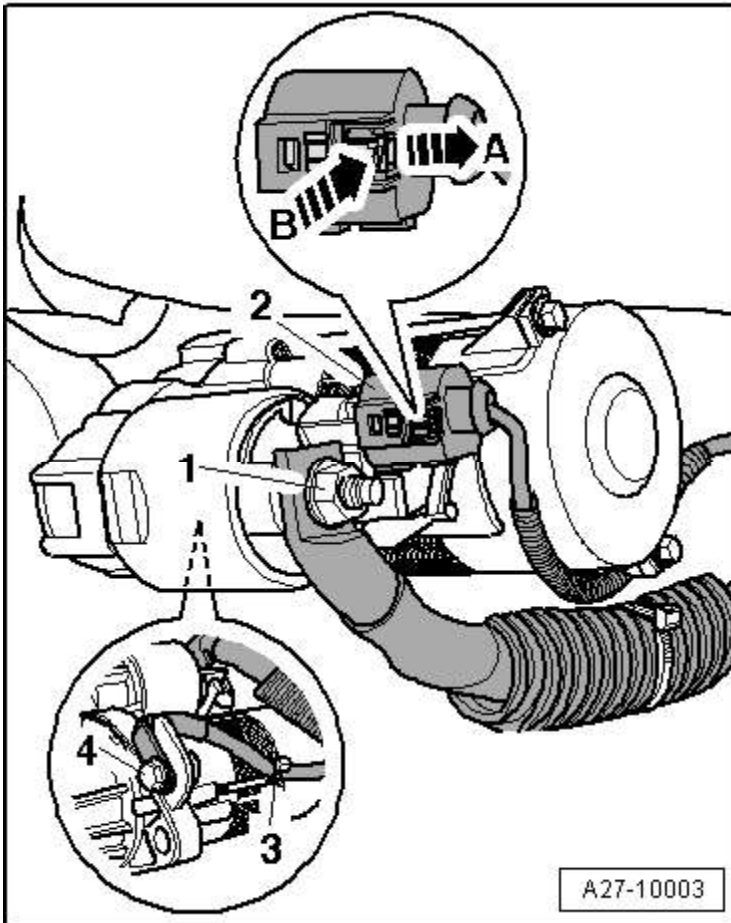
Identifying Electrical Connection, Locking Mechanism, Nut, Ground Wire, And Cable Ties
